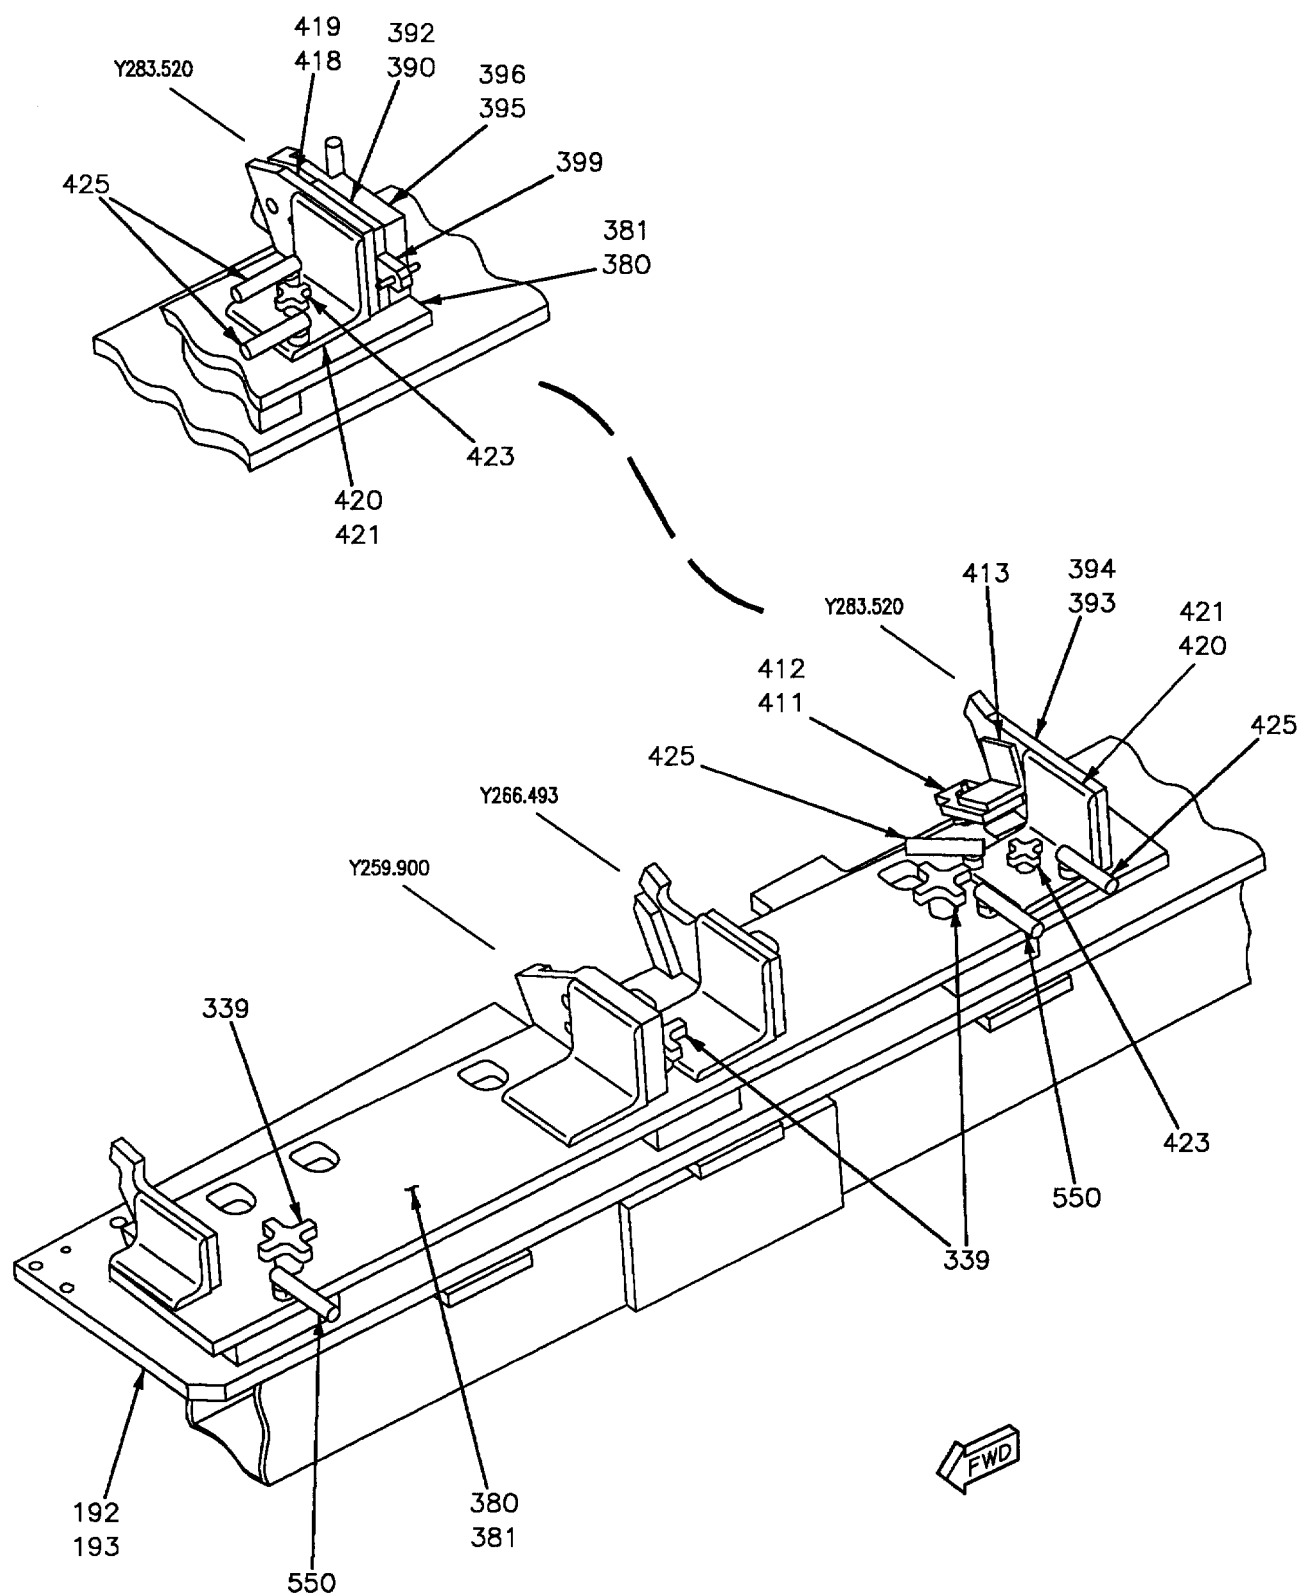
Replacement - Aft Rocket Motor Support (Sheet 1)
